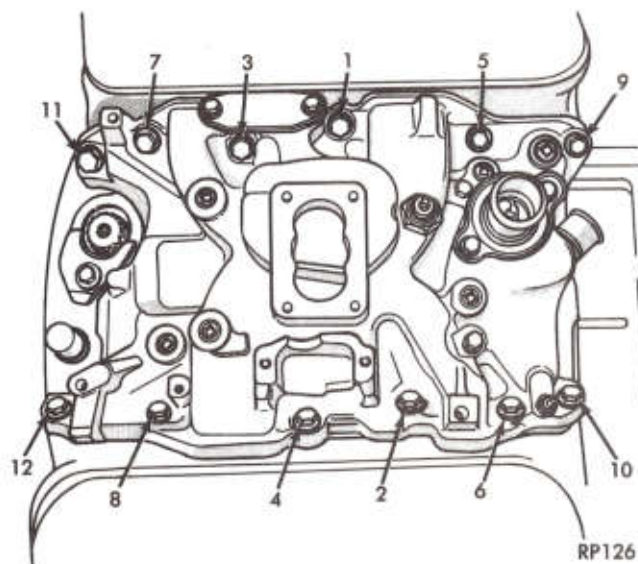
3.9L Intake Manifold Screw Tightening Sequence
